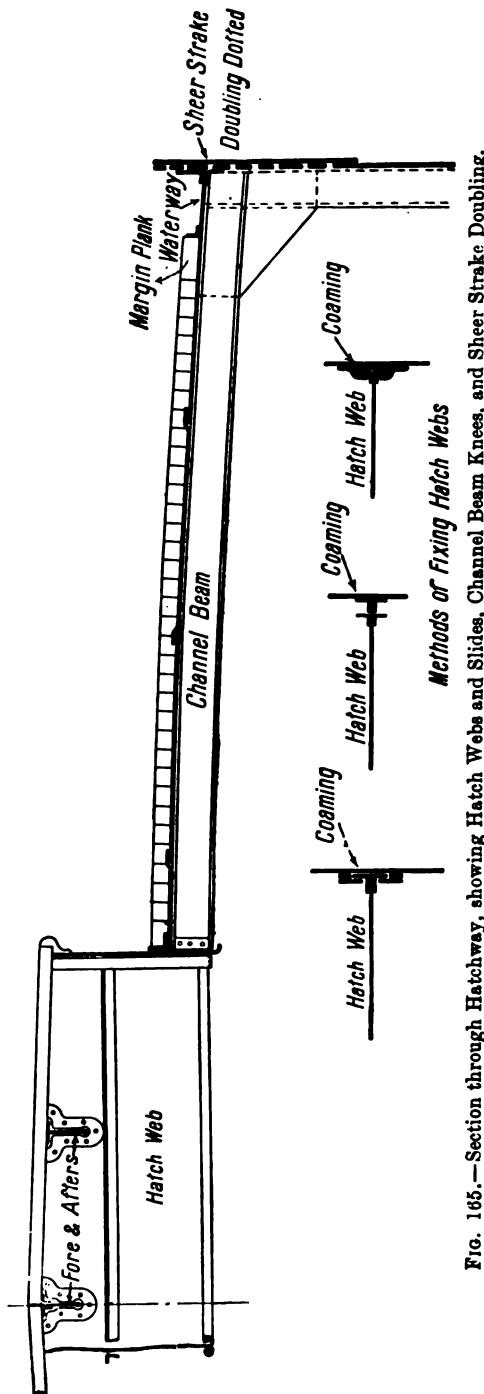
Section through Hatchway, showing Hatch Webs and Slides, Channel Beam Knees, and Sheer Strake Doubling.
